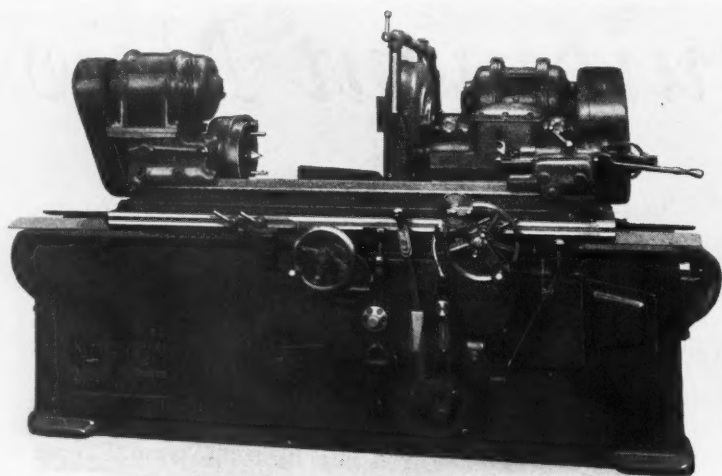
One of a Line of Type C Cylindrical Grinding Machines that is Built in a Wide Variety of Models by the Norton Co.
